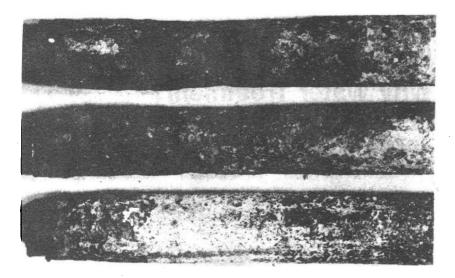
Corrosion on boiler tubes. (Babcock & Wilcox Co.)
